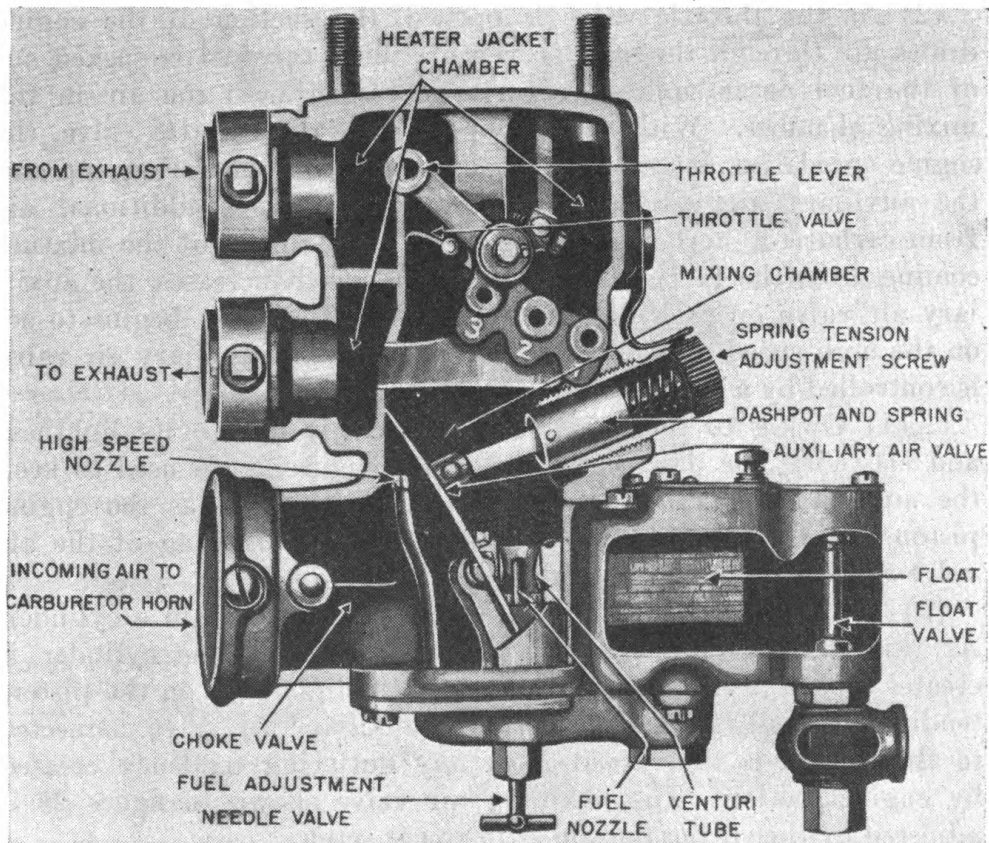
Use of an auxiliary air valve to control fuel mixture in a carburetor.
